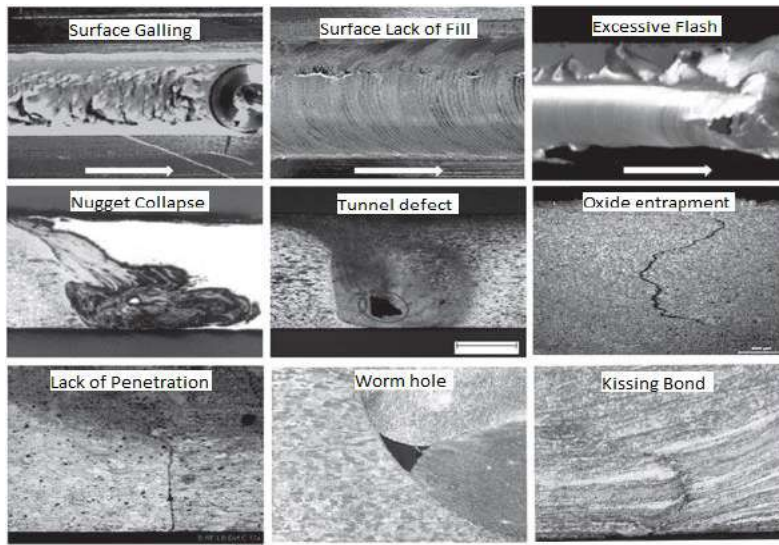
Friction Stir Welding defects (Zettler and Vugrin 2003)
